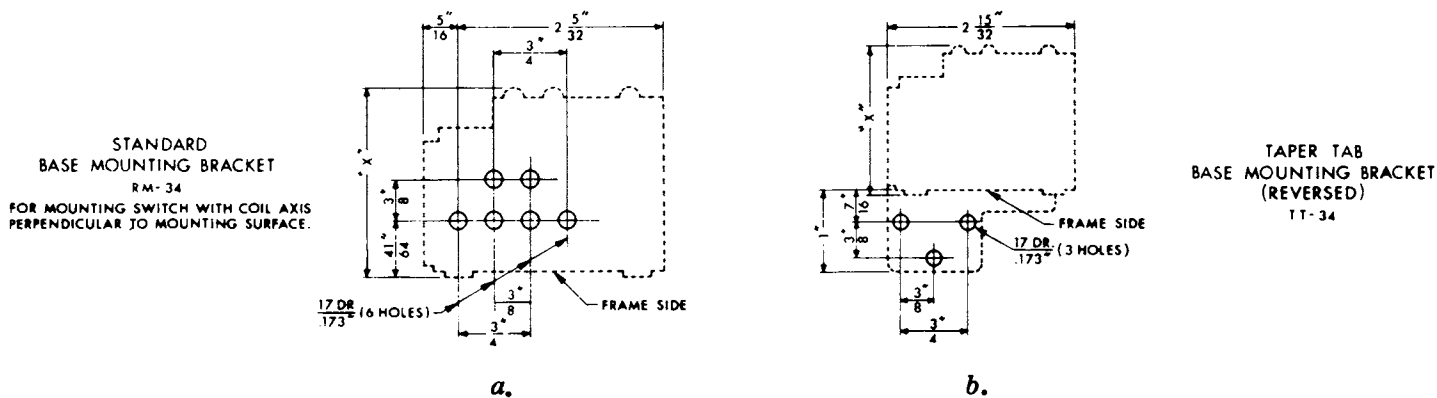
Type 40 and type 44 rotary switch base mounting bracket.
